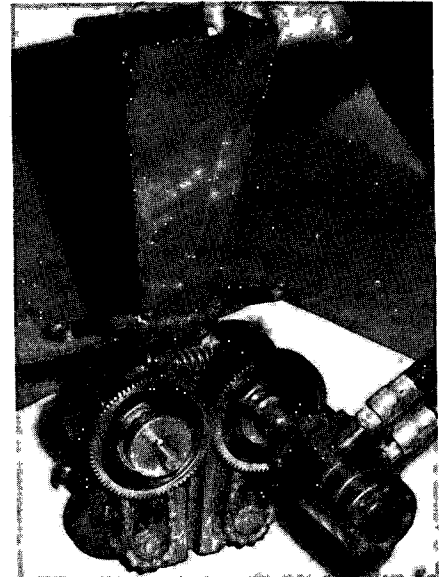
Hydraulic four-roller cutting planting mechanism—1964–68.
